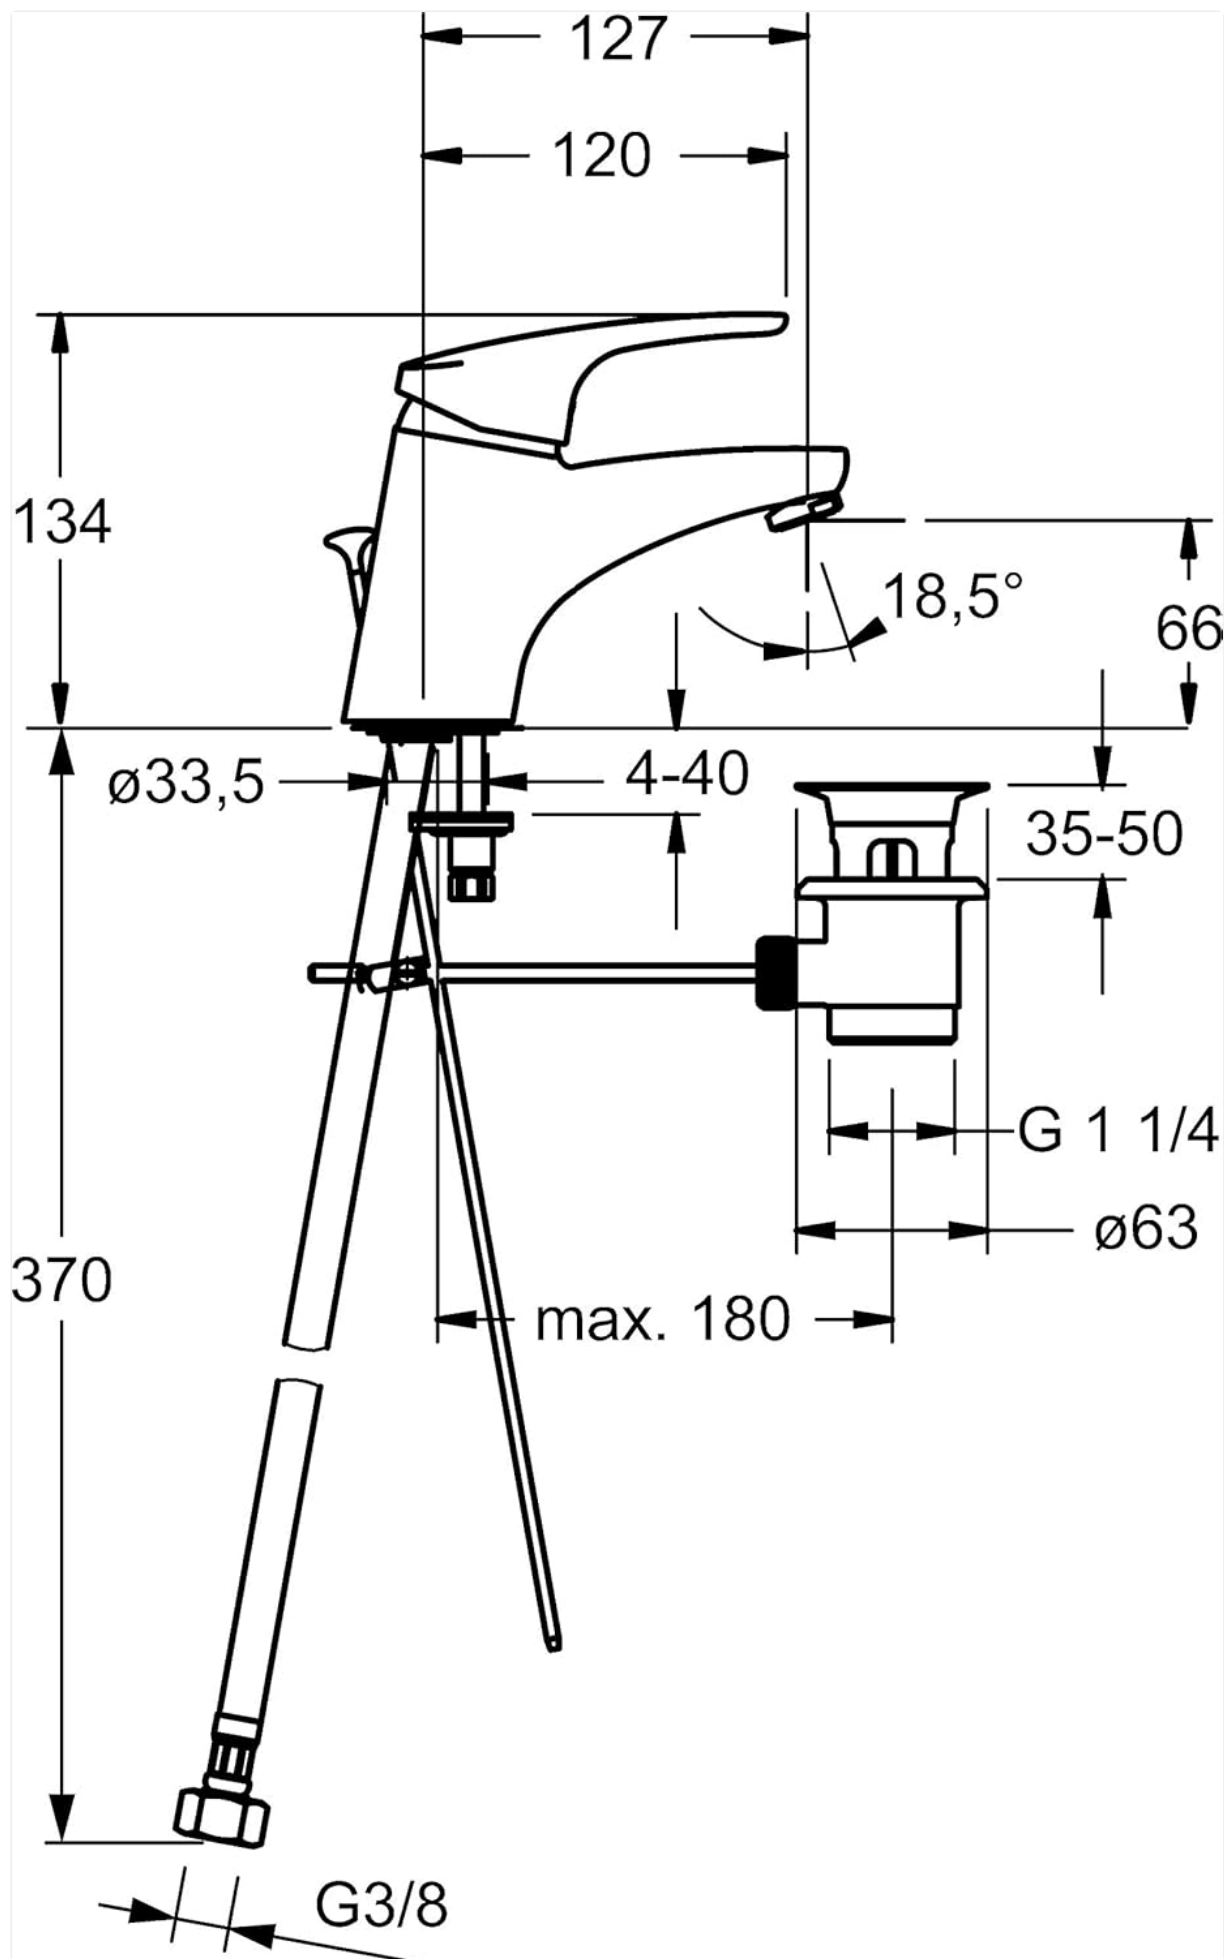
Technical drawing with dimensions for the Hansa Hansamix Single-Lever Basin Mixer. This diagram illustrates
